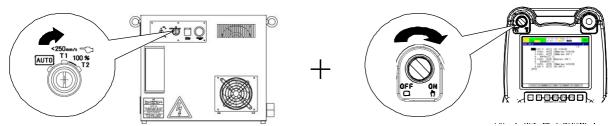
(a) Setting of 3 mode switch and teach pendant switch
